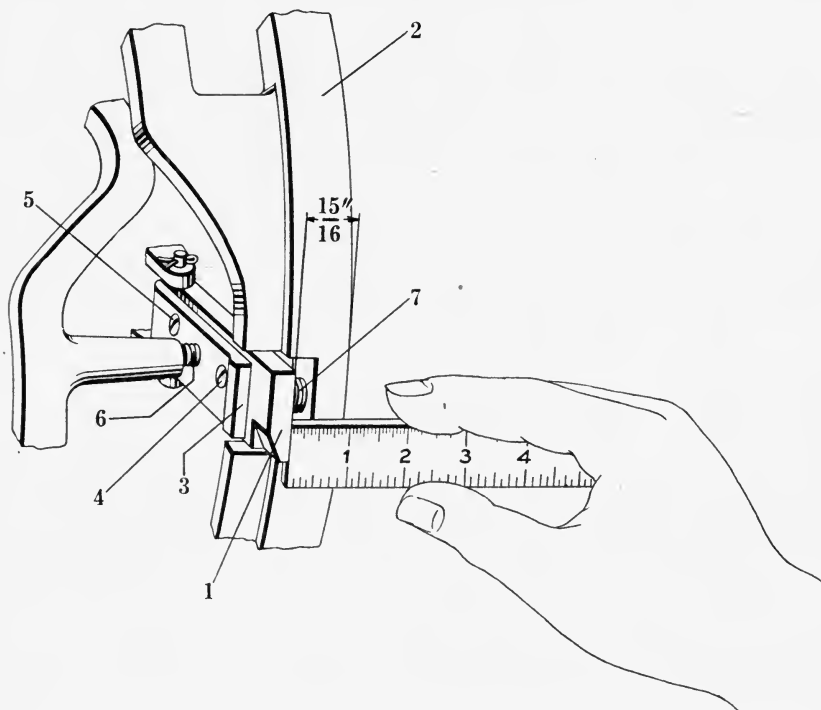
Back View of the Automatic Stopping Pawl, and a section of the delivery and elevator transfer cam (cam No. 10) at 2. The automatic stopping pawl 1 is adjusted for position by the screw 6 until the right side of the pawl (standing back of the machine) is $15/16$ " from the right side of the cam rim.
